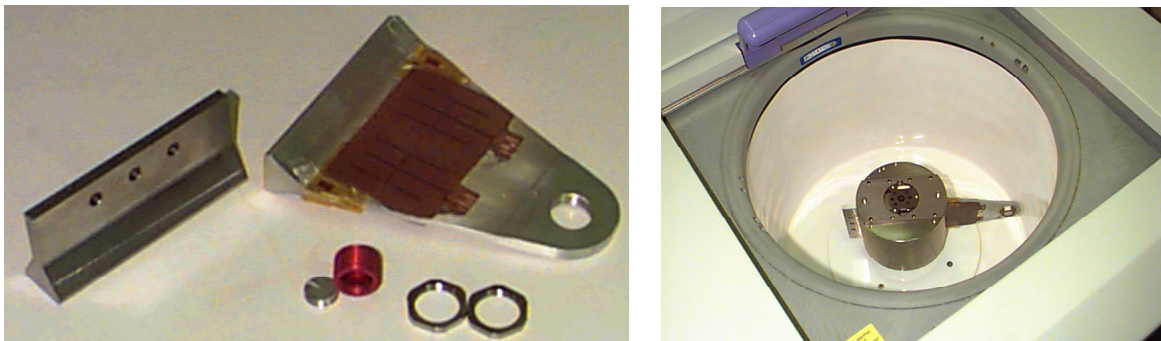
Test blade and other hardware during assembly and centrifuge fit checks
